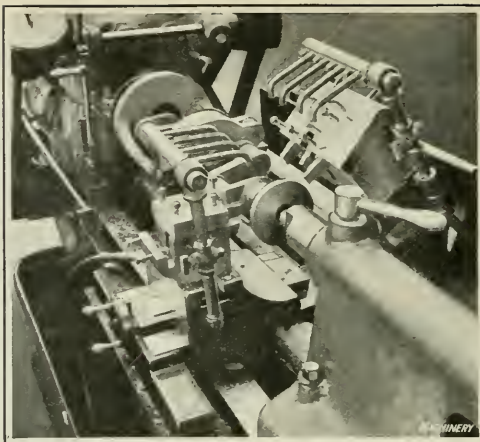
Crankshaft End Bearings being machined with the Part supported by a Spindle Fixture
